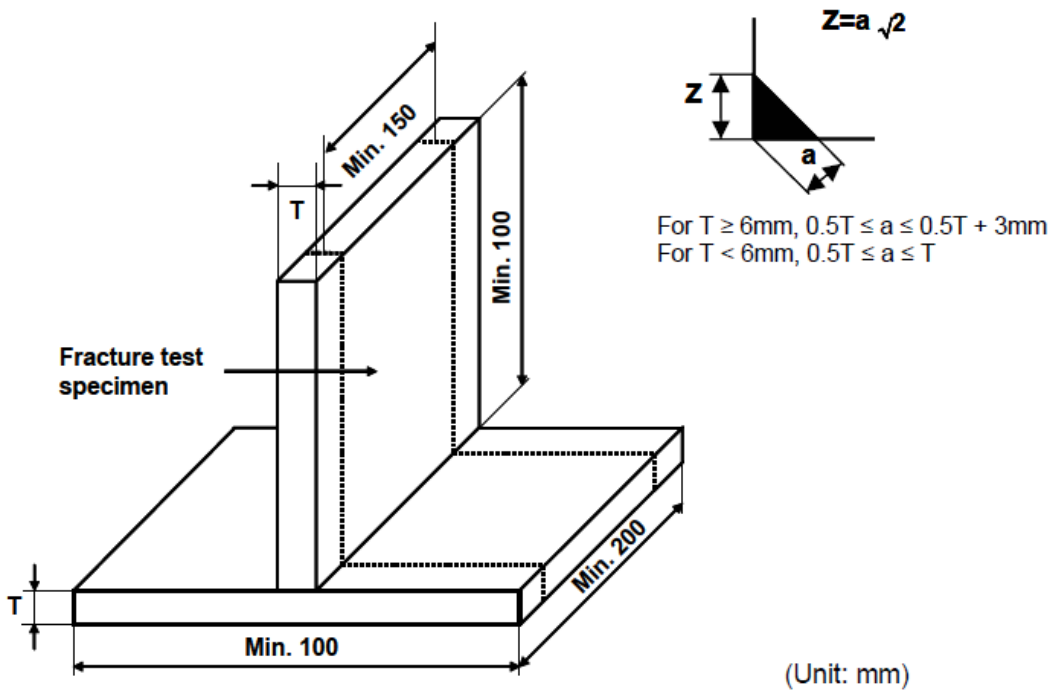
Dimensions and types of test assembly for fillet welds
